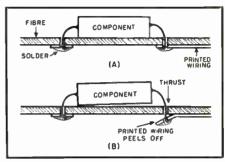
The correct and incorrect way of mounting components on printed wiring boards. The result of using excessively long component pigtails for a repair is shown in (B).
